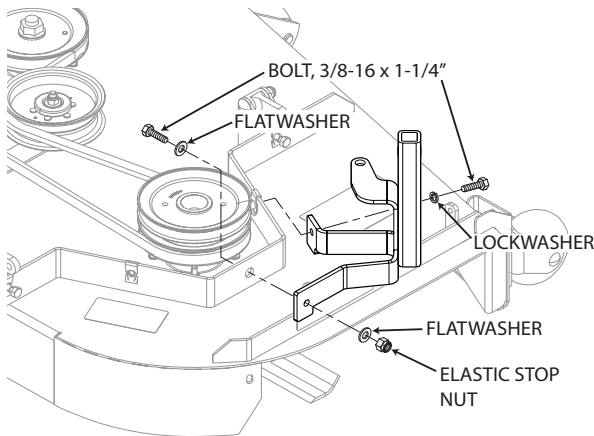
Install Grass Catcher Spindle Pulley
